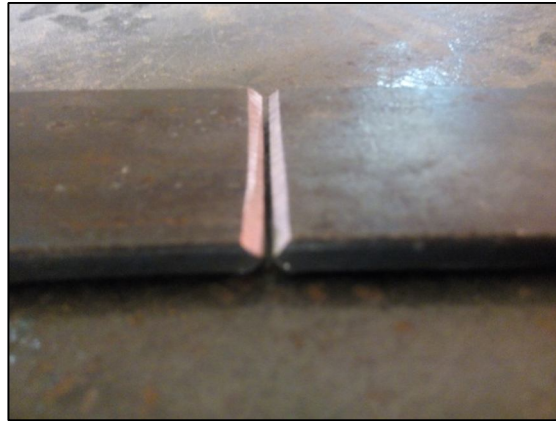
Prepared double V-groove shape joint for butt welding
